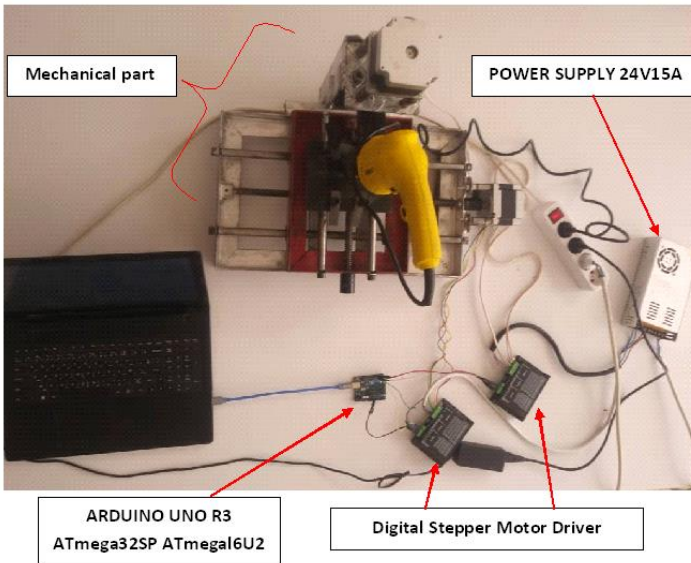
General view of a semi-automated friction stir welding machine.
